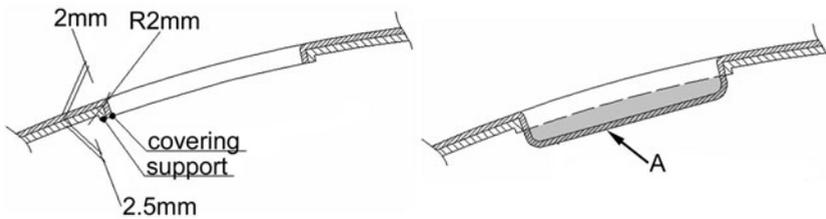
Left: example of external radius; right: finishing of part to be removed.
